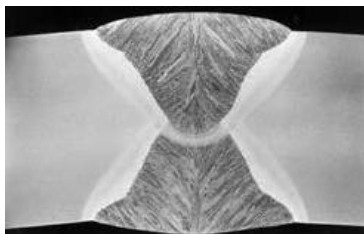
Example SAW seam weld from a UOE formed pipe [1.13].
